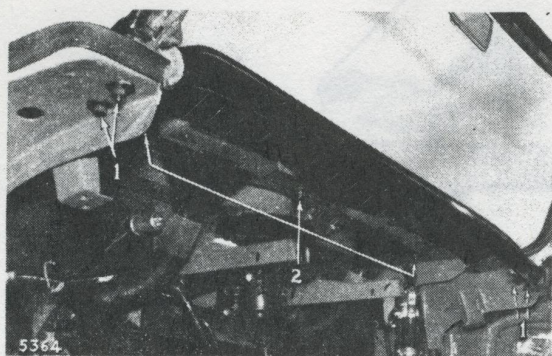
Location of Alpine windscreen assembly retaining nuts. (Facia removed for clarity).
